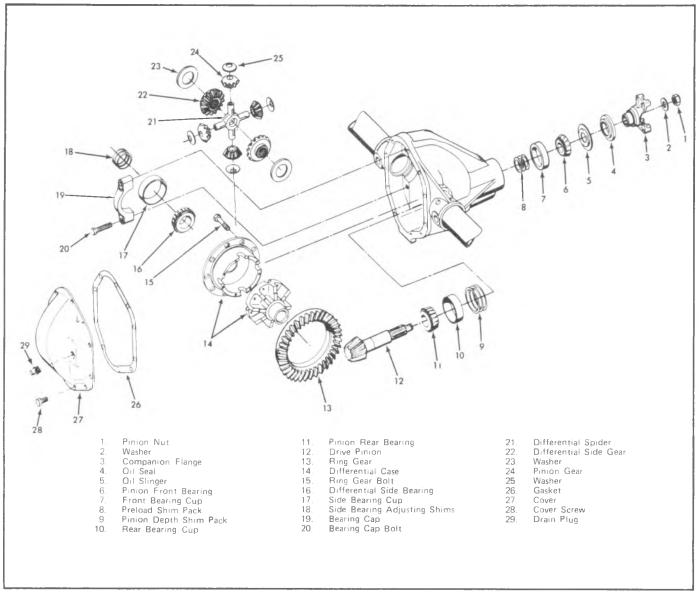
B-6--Dana 10-1/2" Ring Gear Axle Exploded View
